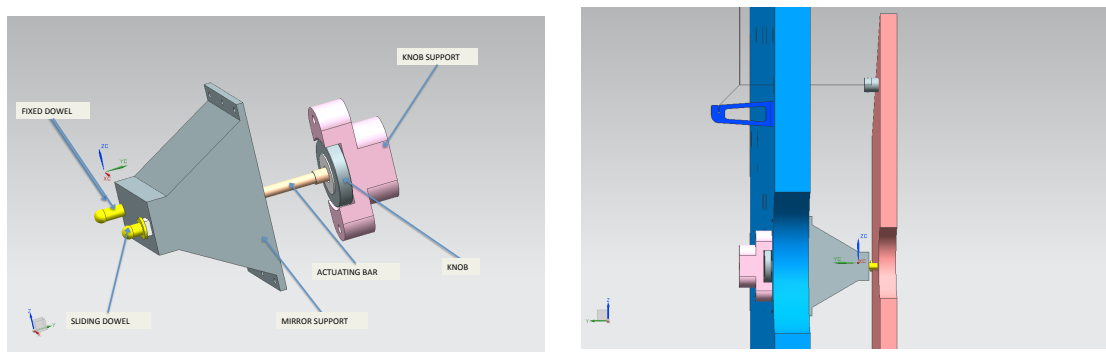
Left: drawing of one dowel holding aluminium cone for mirror support. Right: support panel with all the cones mounted, before installation in the RICH vessel.
